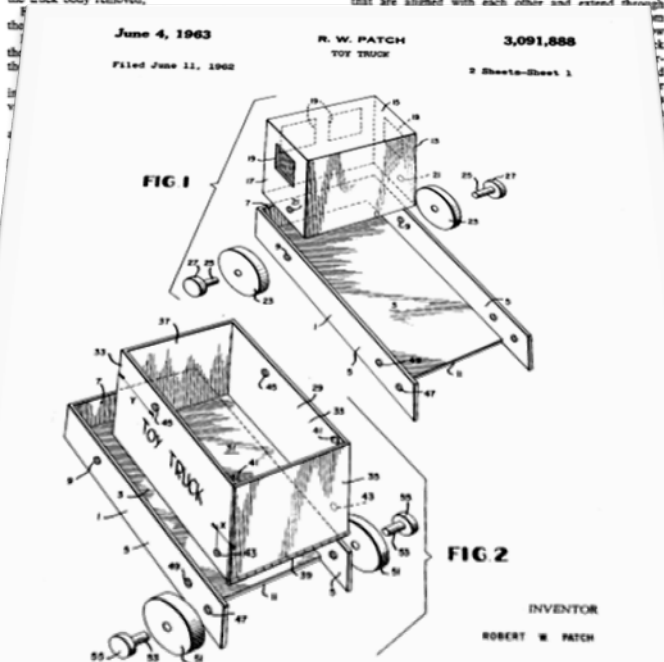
is an exploded perspective assembly view of a toy truck according to the present invention with the truck body removed;
